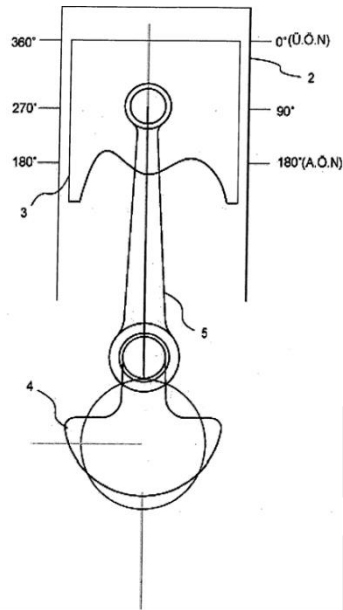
Front schematic view of the cylinder system of a traditional engine [2].
